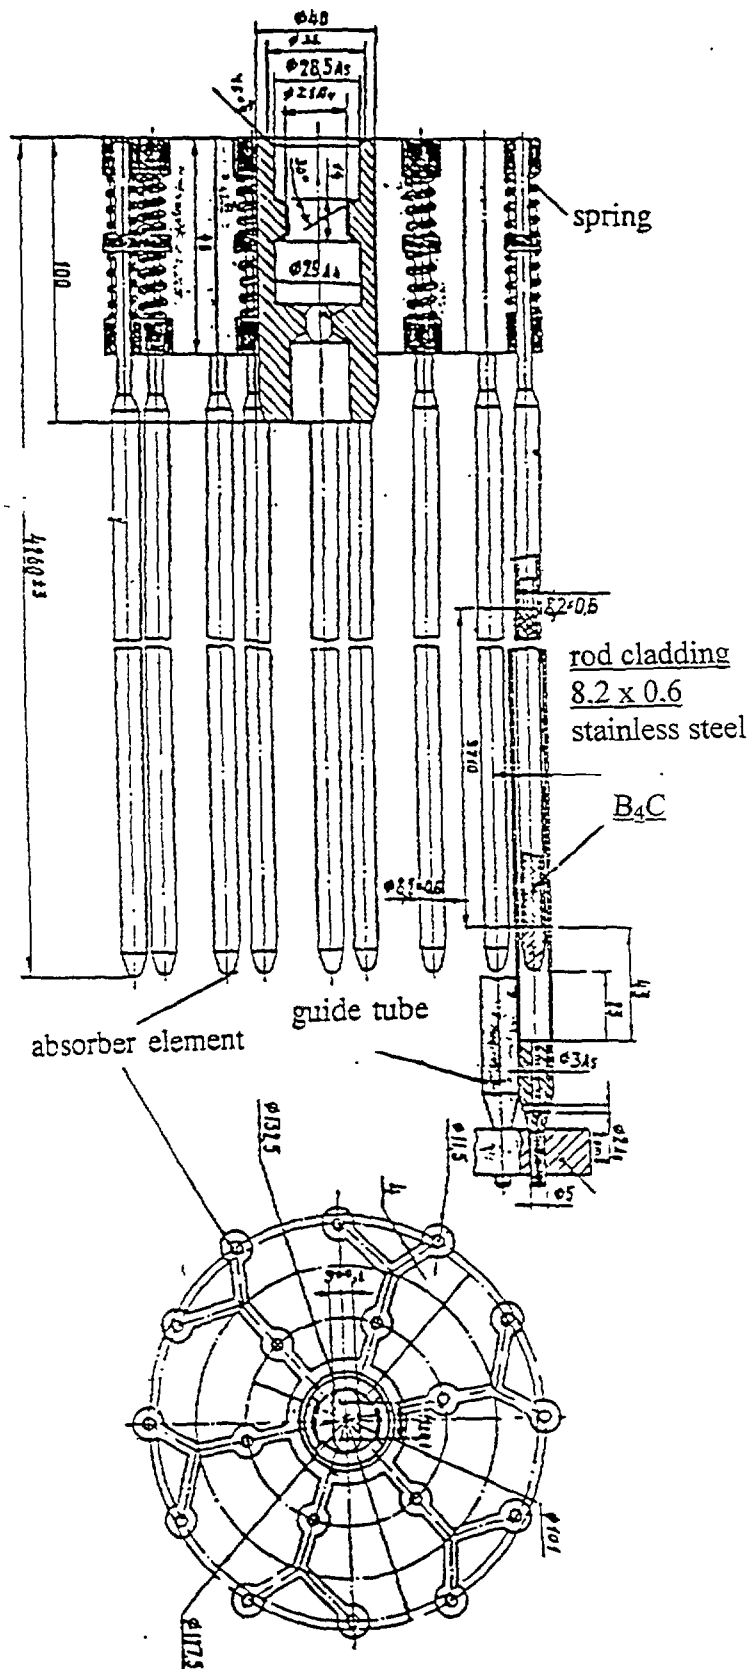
WWER-1000 Rod cluster control assembly (RCCA) design
